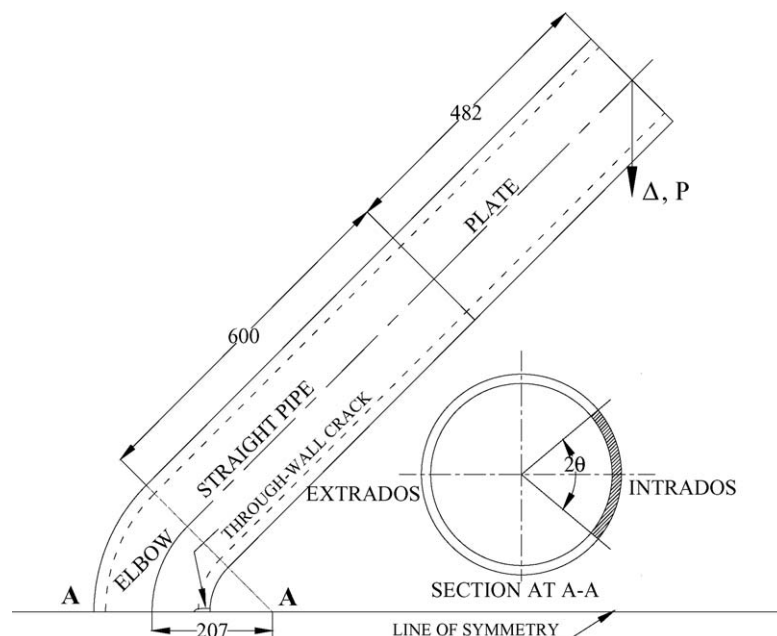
Circumferential through-wall cracked elbow subjected to bending load (All dimensions are in mm).
